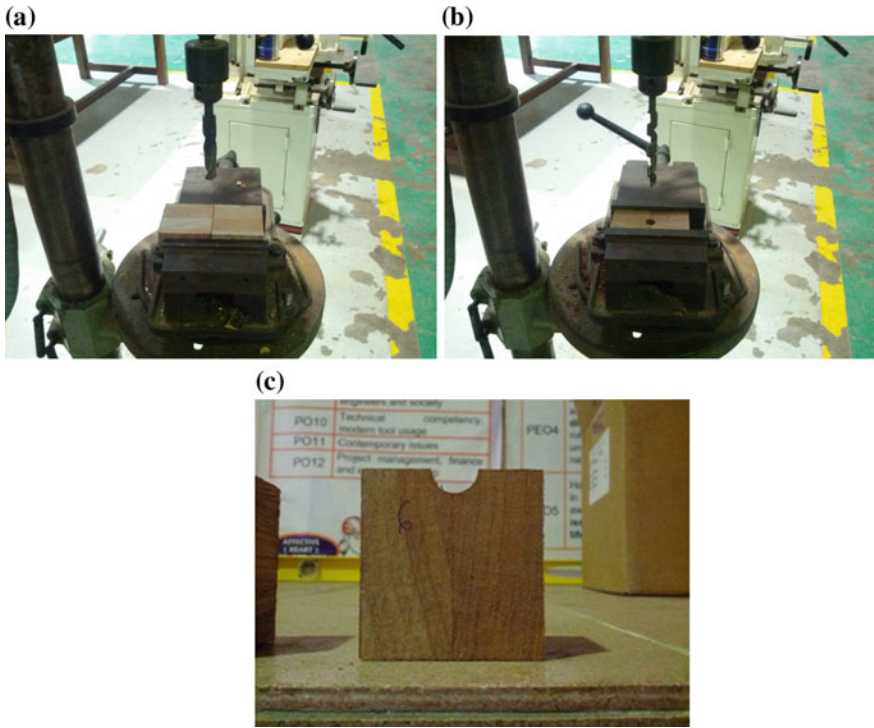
The step of drilling the specimen where a the specimen are clamped together, b the specimen is drilled at the center by avoiding the glue lines using radial drilling machine and c the specimen is cut into two using radial arm saw
